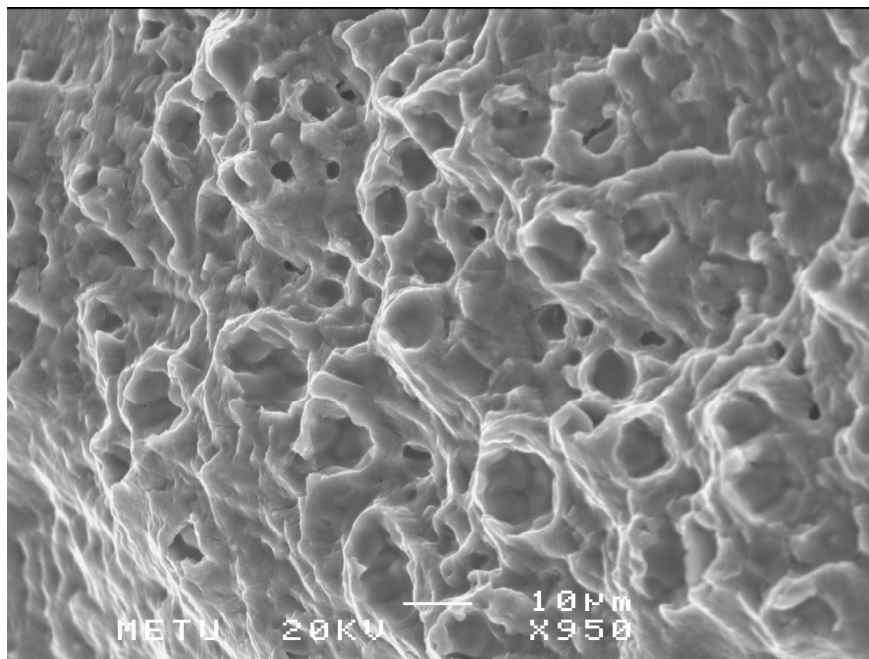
Dynamic Loading Specimen, Stage 3 fatigue fracture surface SEM image
